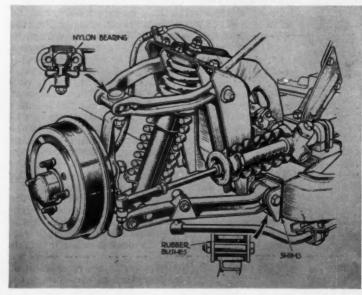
Details of Triumph Herald front end showing use of rubber and nylon to eliminate lubrication points.
